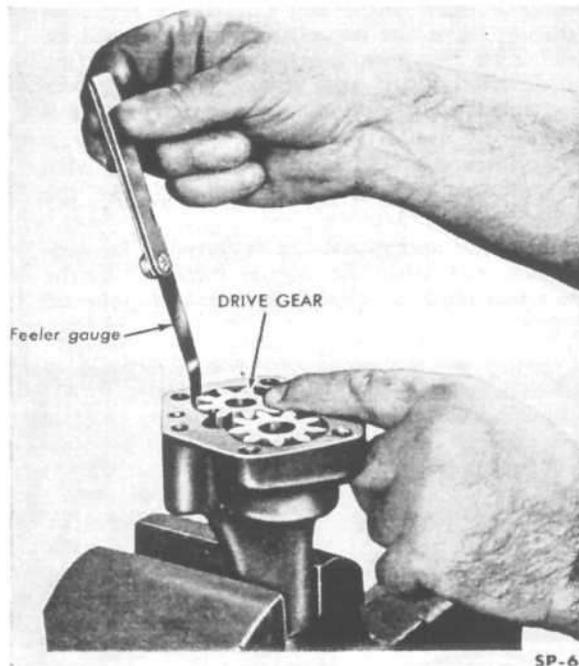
CHECKING GEAR TOOTH TO BODY CLEARANCE
